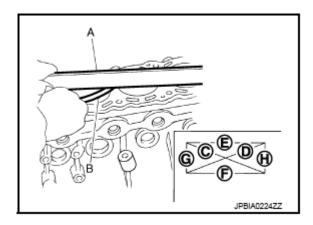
Measuring Distortion On Cylinder Block Upper Face Using Straightedge And Feeler Gauge
